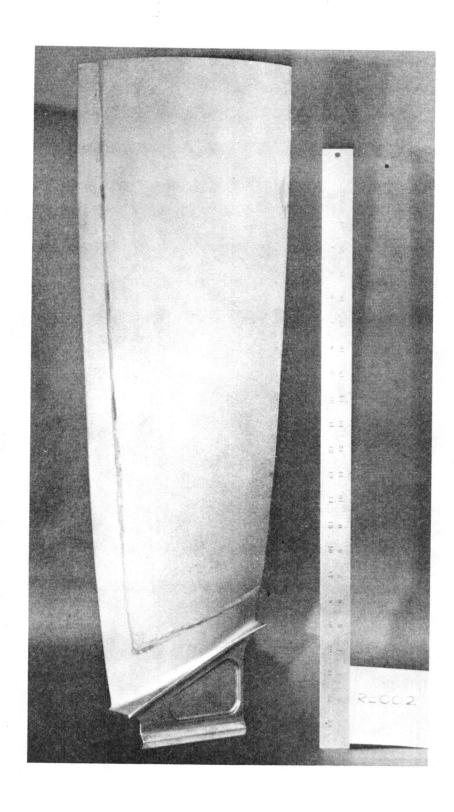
Superhybrid - CF6 TiCom Prototype Blade, S/N RL002.
